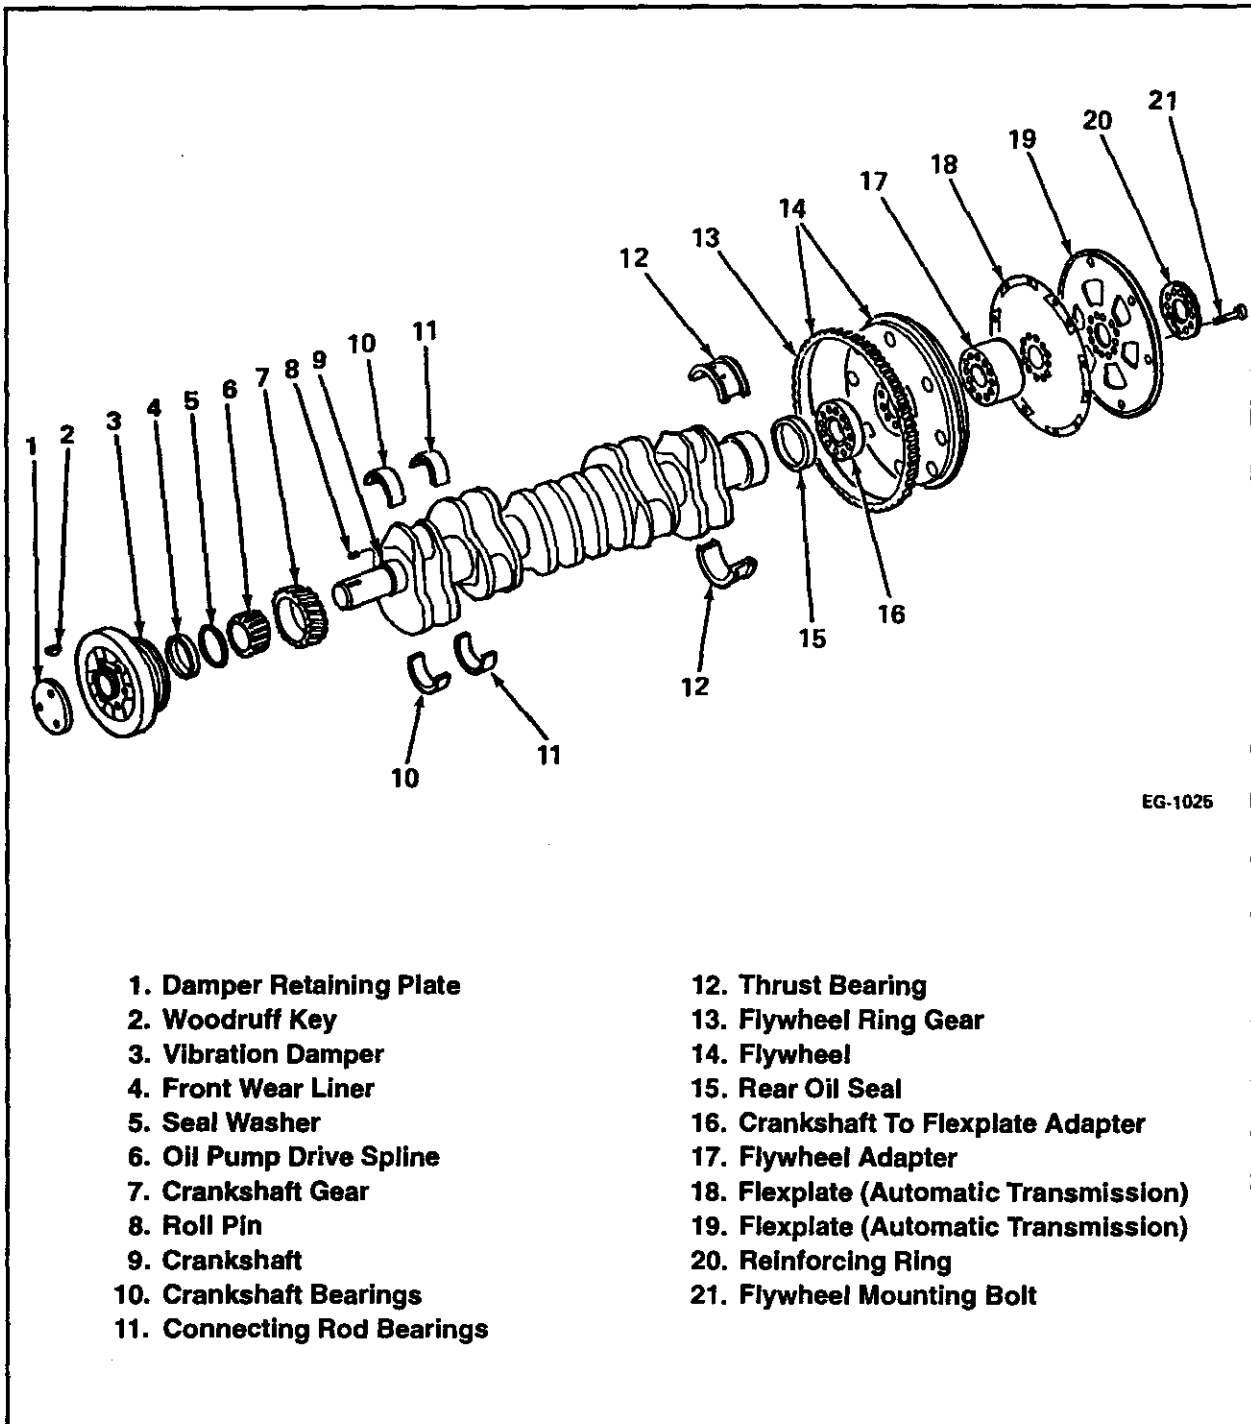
Crankshaft, Bearings, Flywheel and Related Components.
